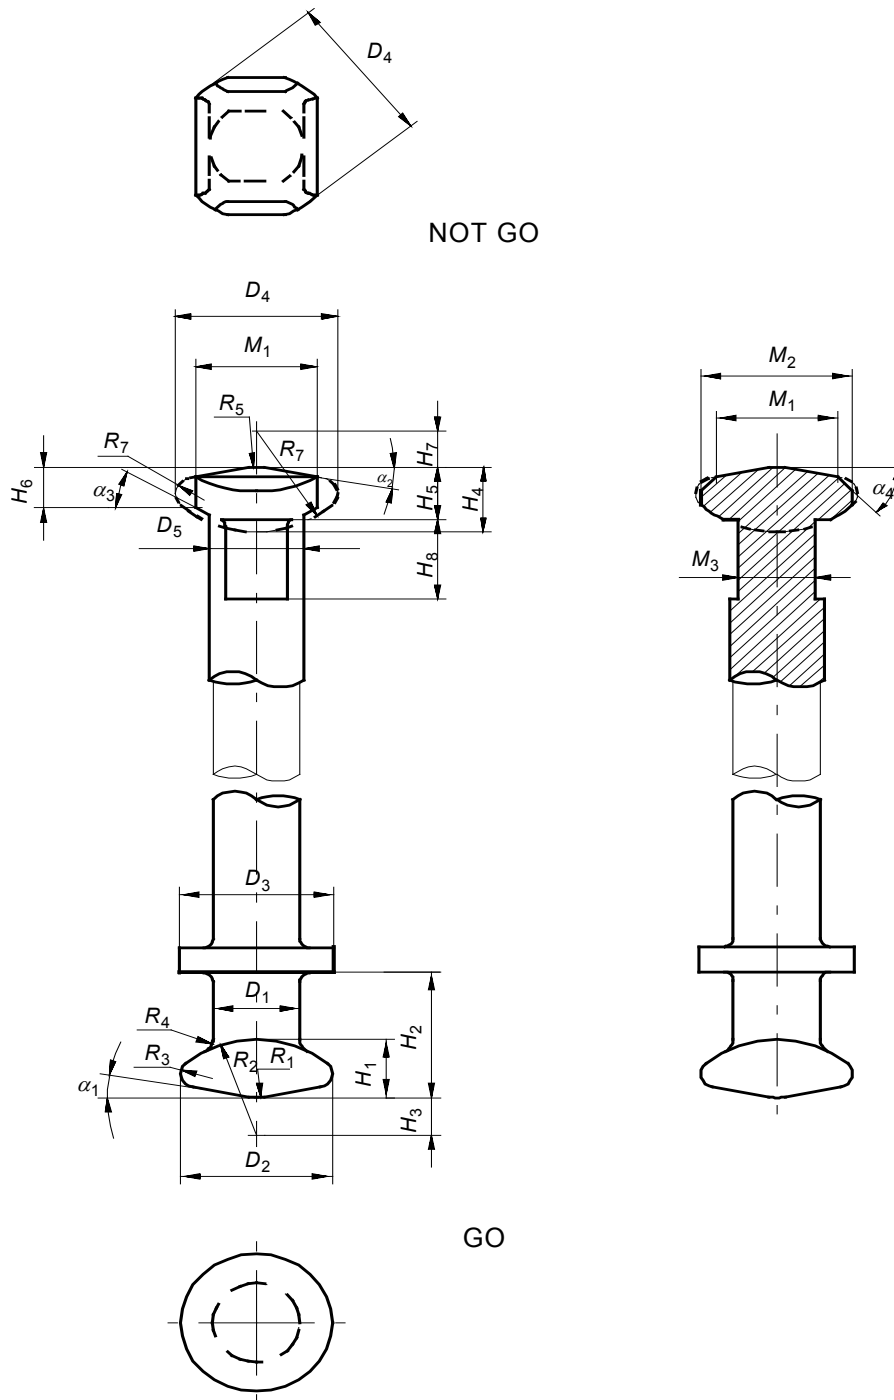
Dimensions of gauge for ball coupling size 22N
